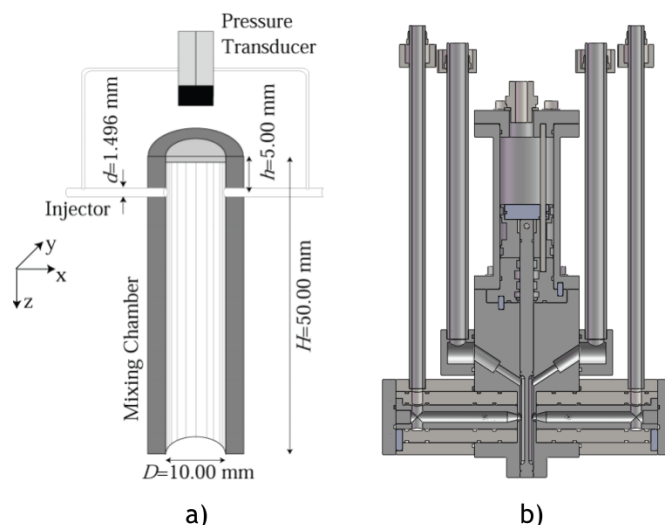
Mixing chamber: a) scheme and b) mixing head drawing
